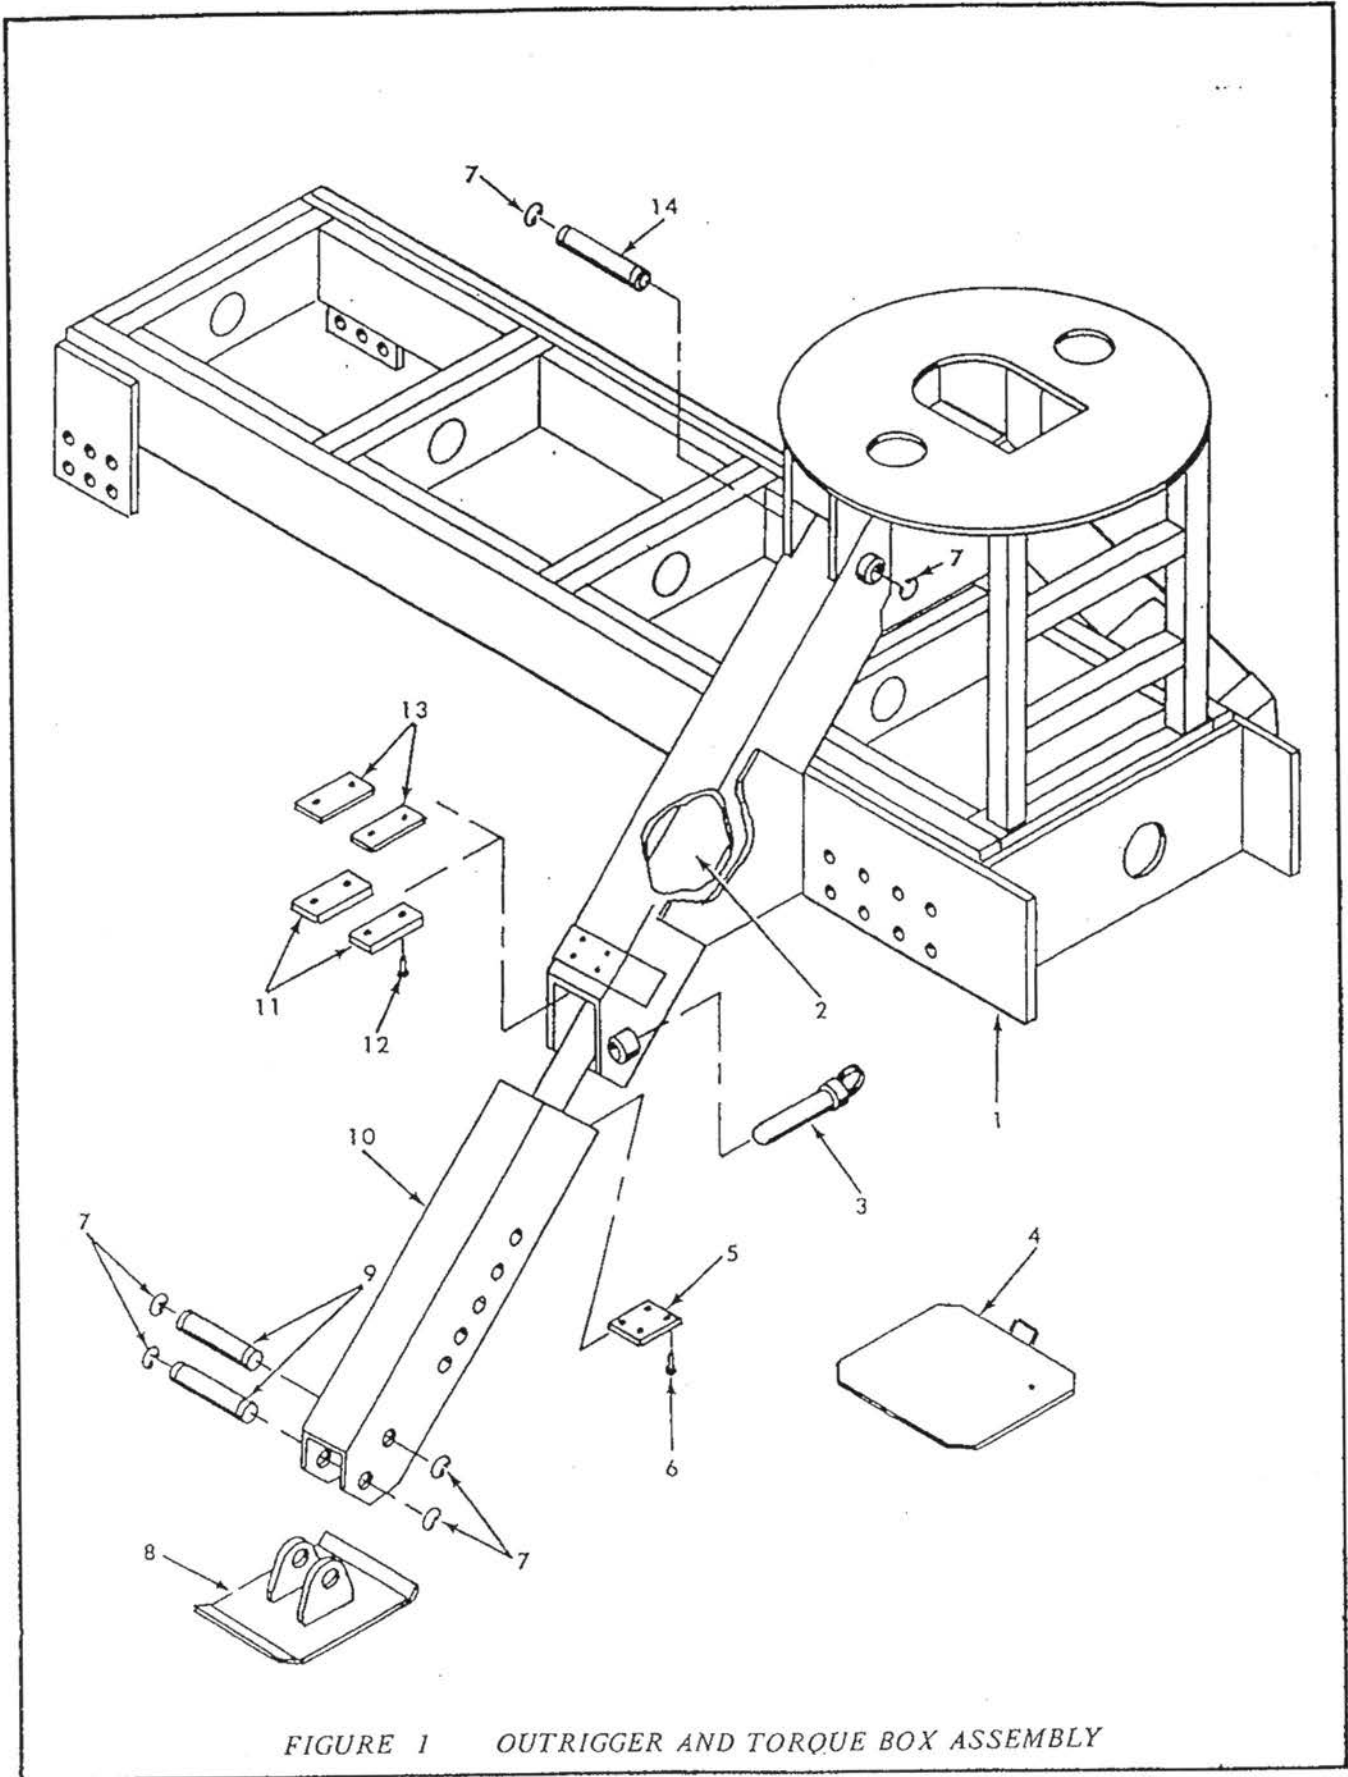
OUTRIGGER AND TORQUE BOX ASSEMBLY
